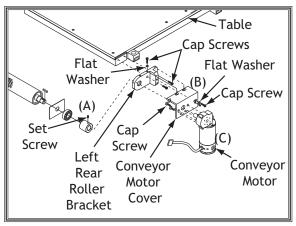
Removing conveyor motor and rear roller bracket (not all components shown for clarity).
